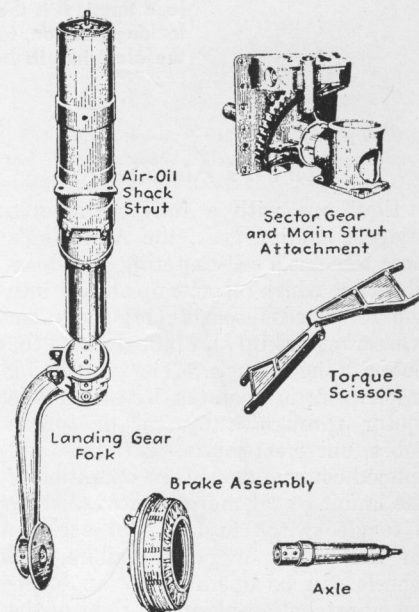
Component parts of a main landing gear strut and brake assembly.
